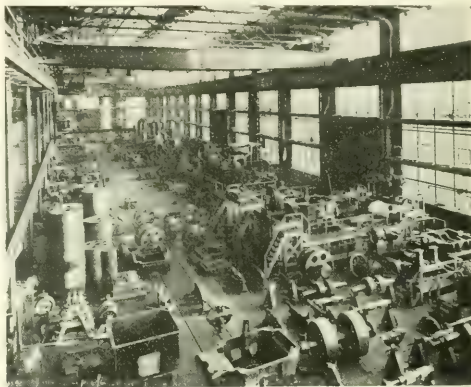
ERECTING DEPARTMENT, TURBINE TEST FLOOR
